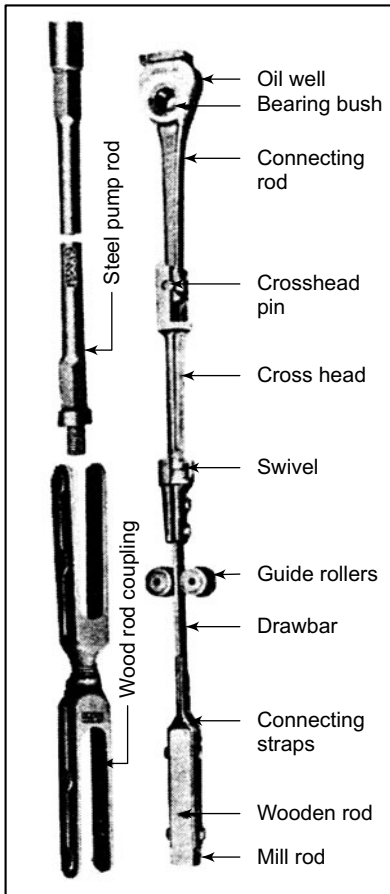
Connecting rod assembly and parts of a typical windmill
